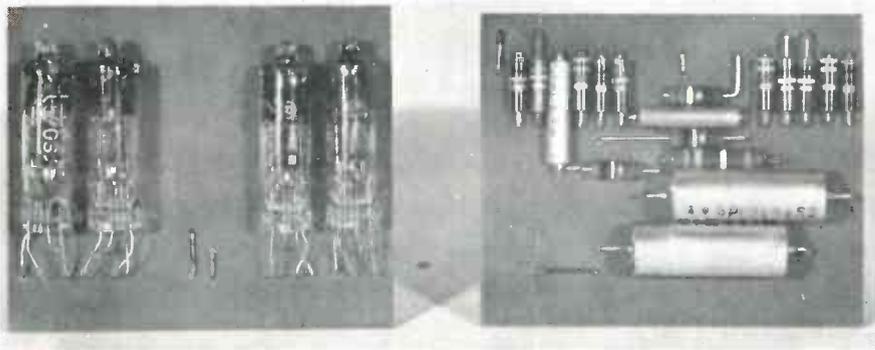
Reverse side of boards in Fig. 2b shows tubes and components connected to wiring
